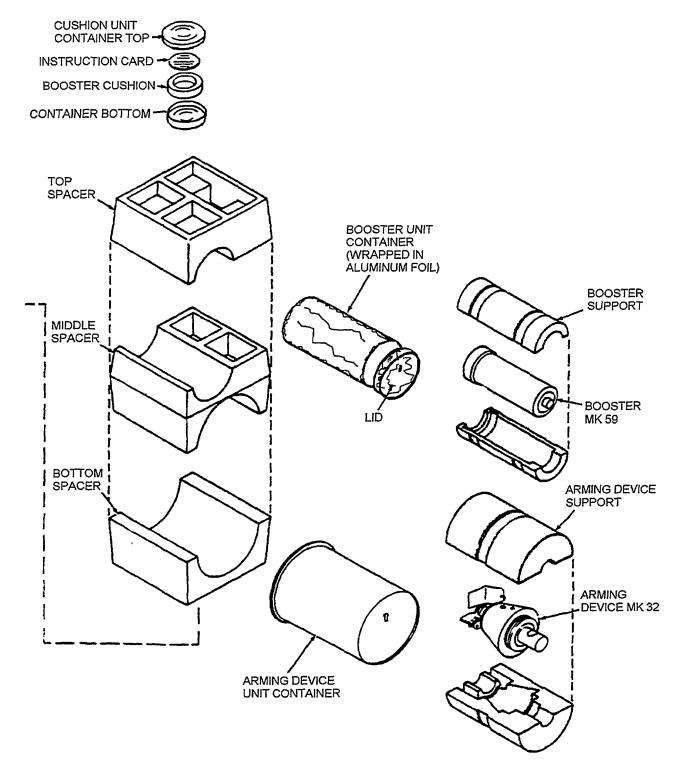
Bomb/Mine Conversion Kit Mk 130 Repackaging (Sheet 2)
